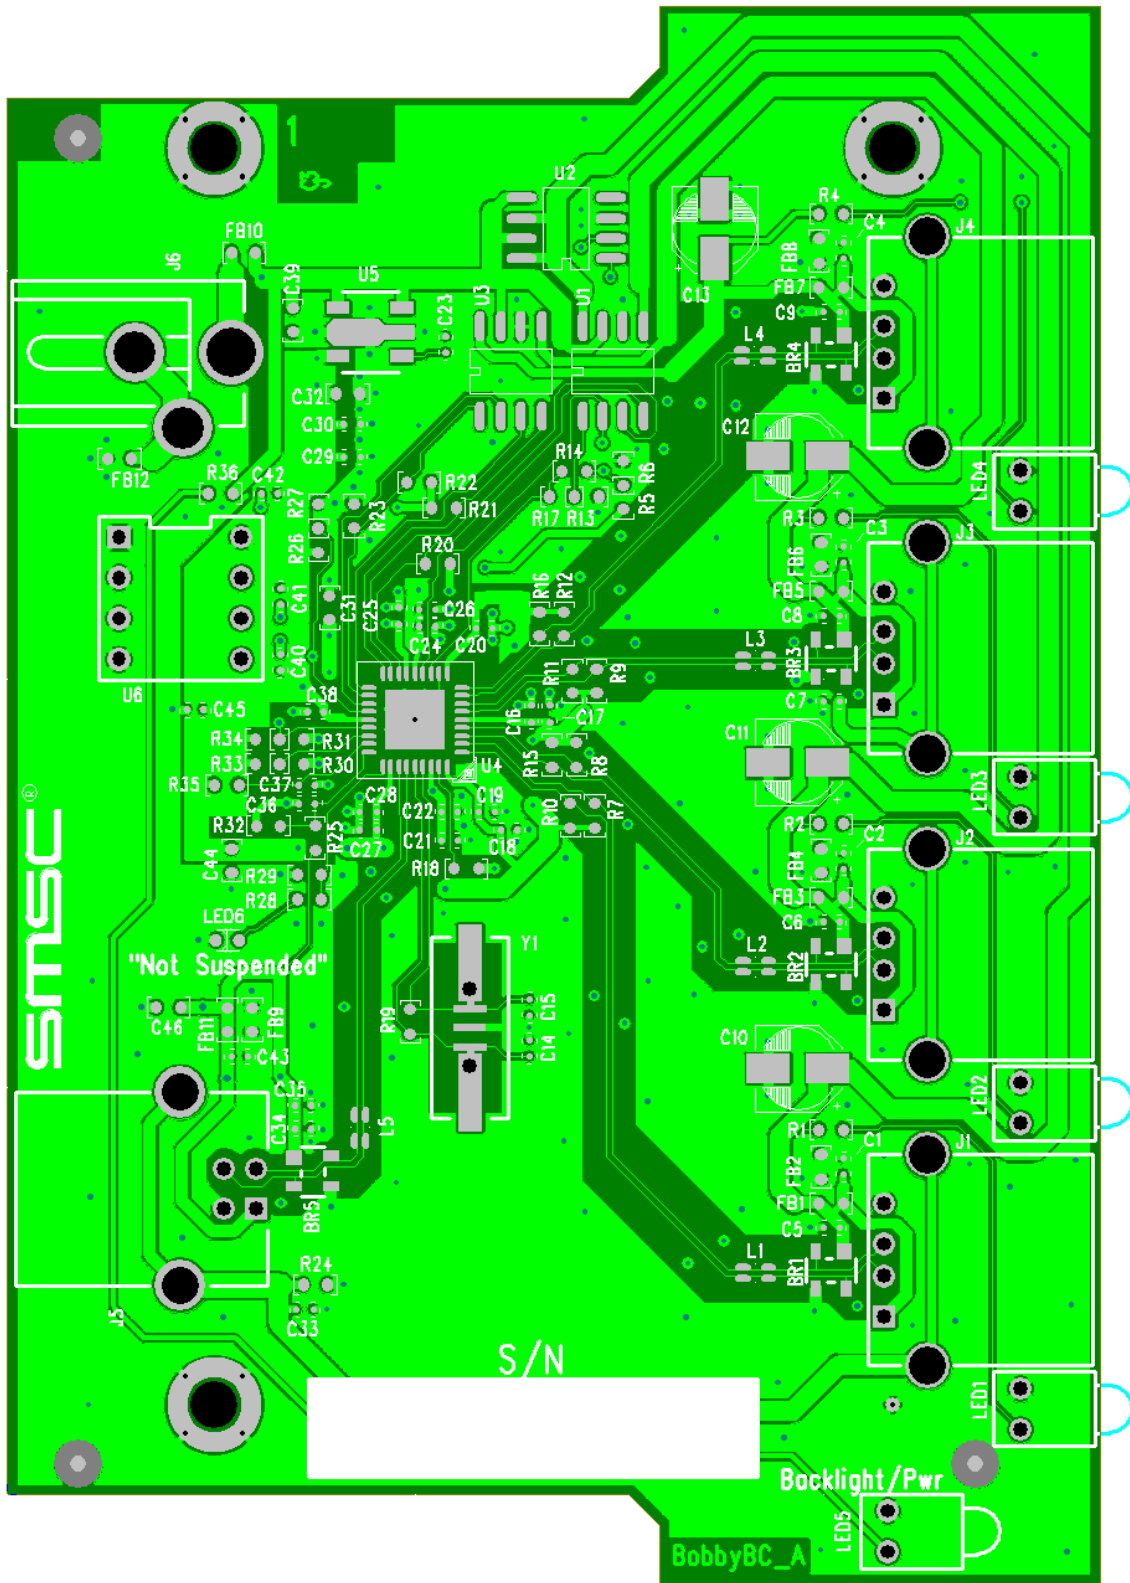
EVB-USB82514Q36-BAS Top Layer - Component Side
